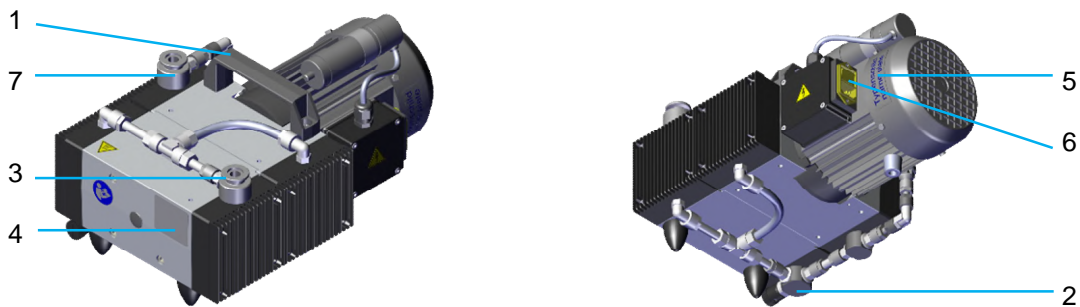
Model MPC 903 Z, front (left) and rear (right) view
